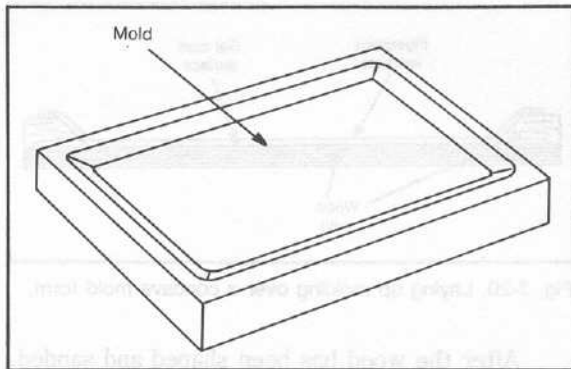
Concave contact mold gives molding with smooth convex side.
